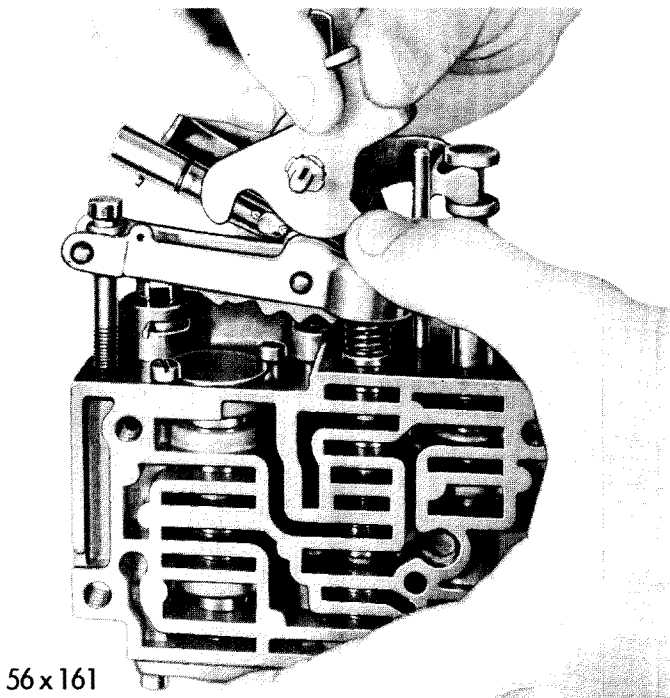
Removal or Installation of Throttle Valve Cam Assembly
